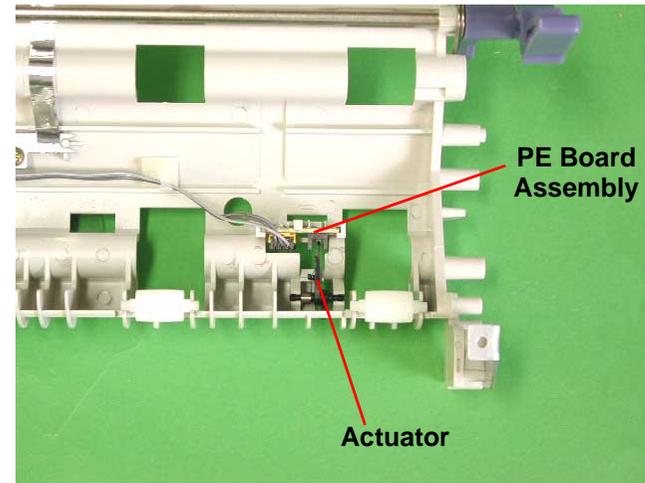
Removing Actuator and PE Board Assembly (2)
